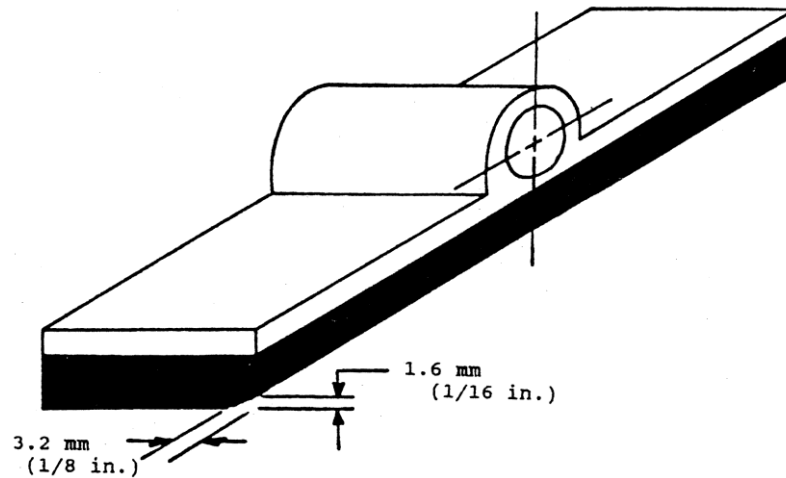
SLIDER ASSEMBLY ILLUSTRATING THE MAXIMUM WEAR ON STRIKING EDGE
